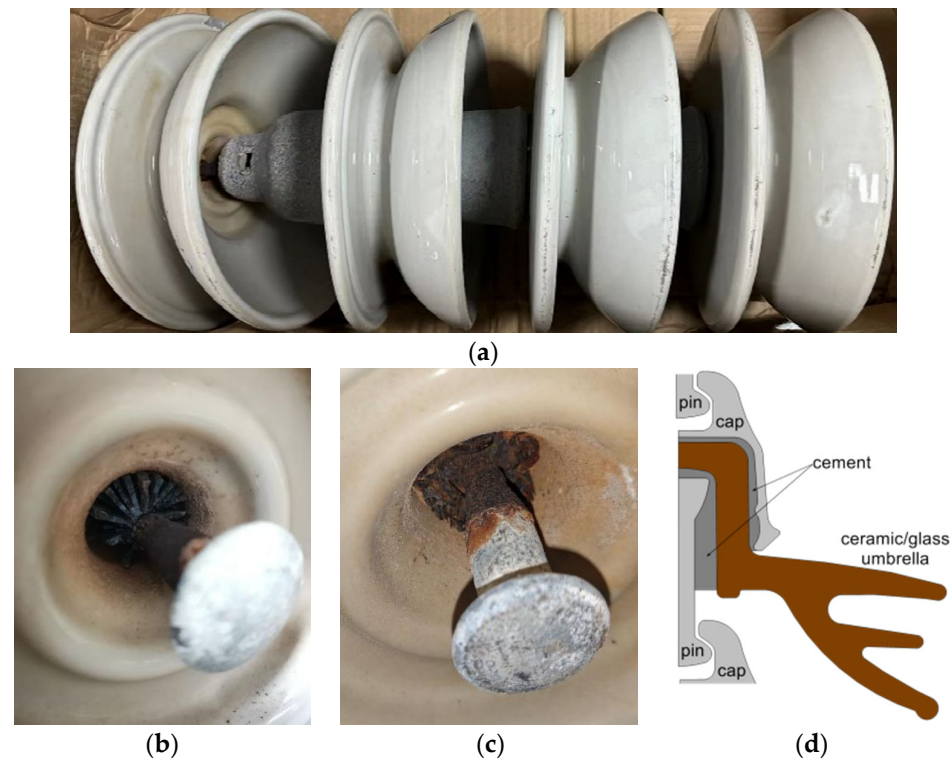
Failure incident of an insulator string due to steel pin corrosion. (a) Overall view of the insulator string. (b,c) Corroded regions on the steel pins. (d) Cross-sectional view of the insulator (XP-50 type).
